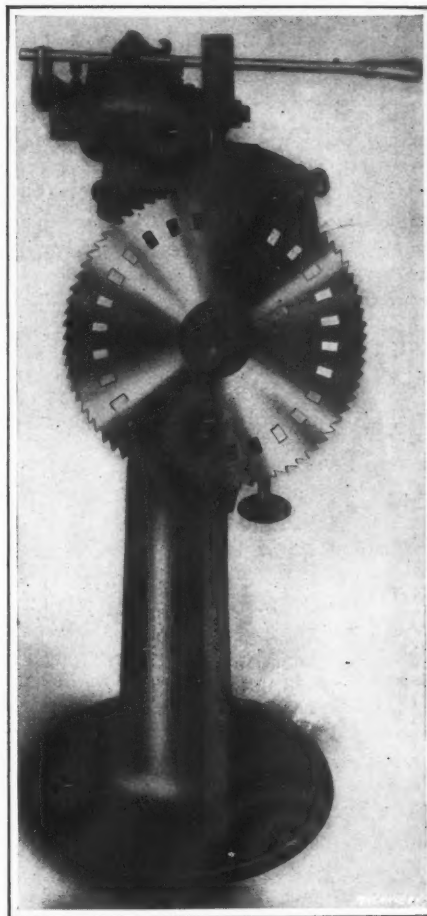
Hunter Grinding Machine for "Land" Type of Circular Saw Teeth
